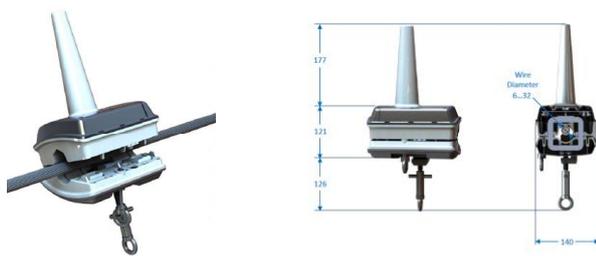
(a) Sensor clamping over the conductor (left) (b) Profile view showing main and secondary screws (right)
